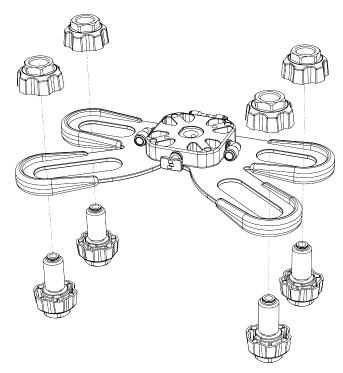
Mounting air nodes (vacuum cups, air bolts, air nuts) on the bracket
